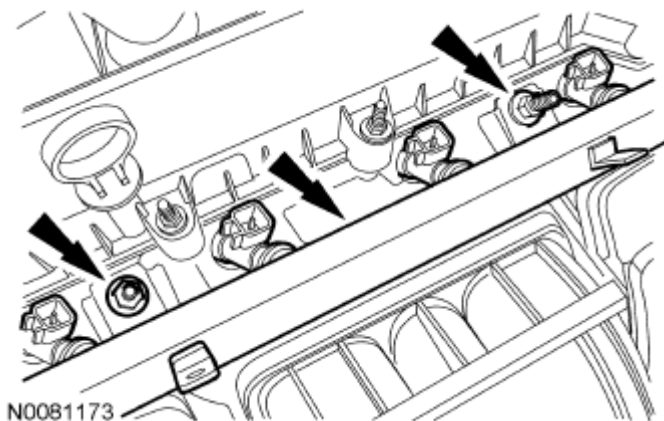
Locating Stud Bolts, Fuel Rail And Fuel Injectors
